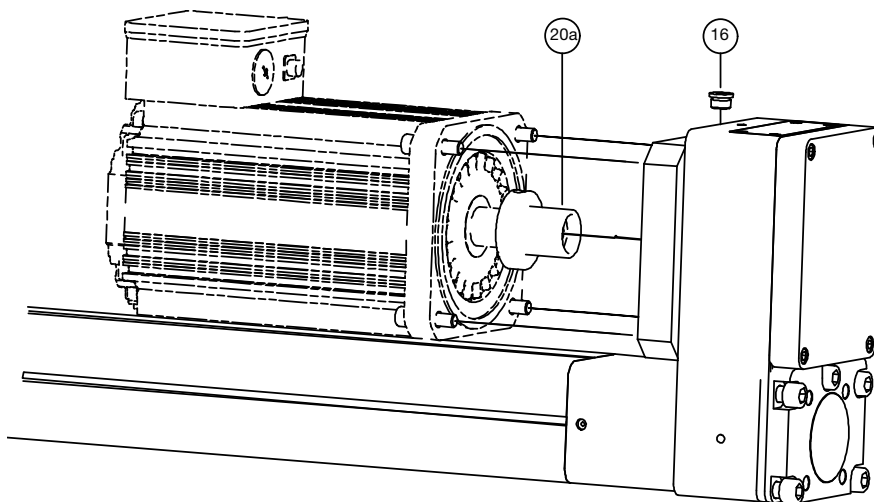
ETH1xx: Motor/ gear assembly parallel with K1M option
